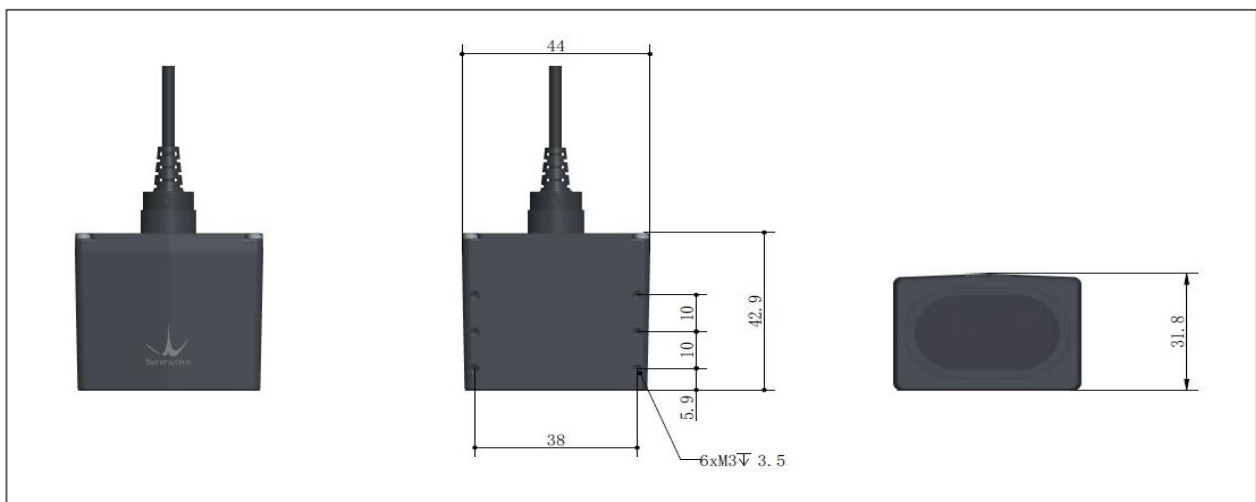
TF03-100 dimensions (Left 1: top view; Left 2: upward view; Left 3: front view) Unit: mm
